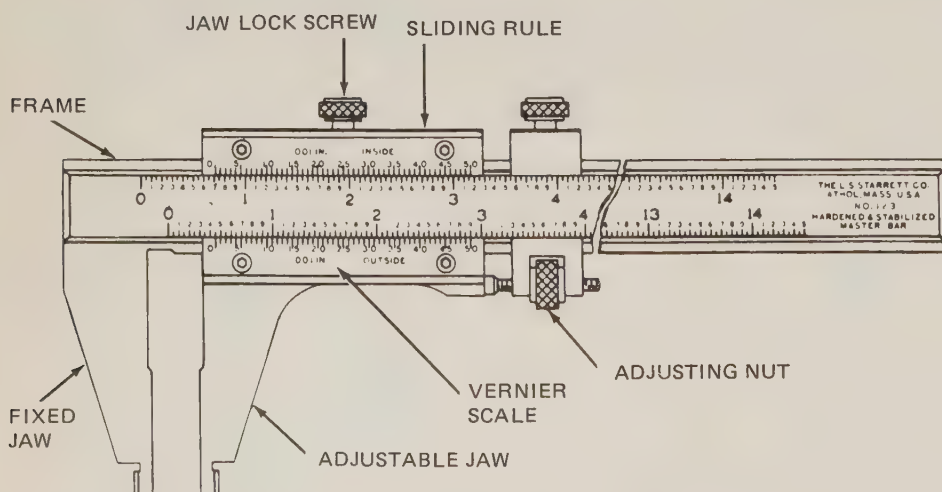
A vernier caliper. (The L. S. Starrett Company)
